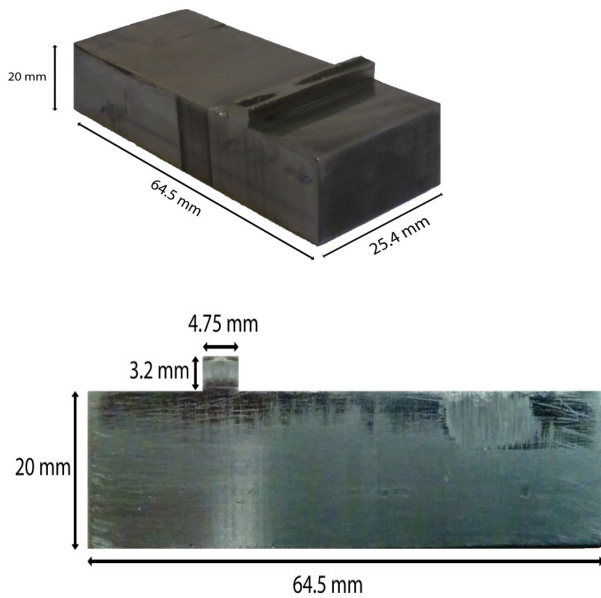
Test specimen were prepared using a wire cut machine in accordance with ASTM A265.
